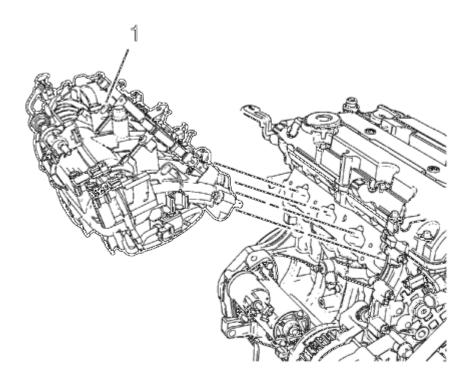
Intake Manifold Bolts Courtesy of GENERAL MOTORS COMPANY
